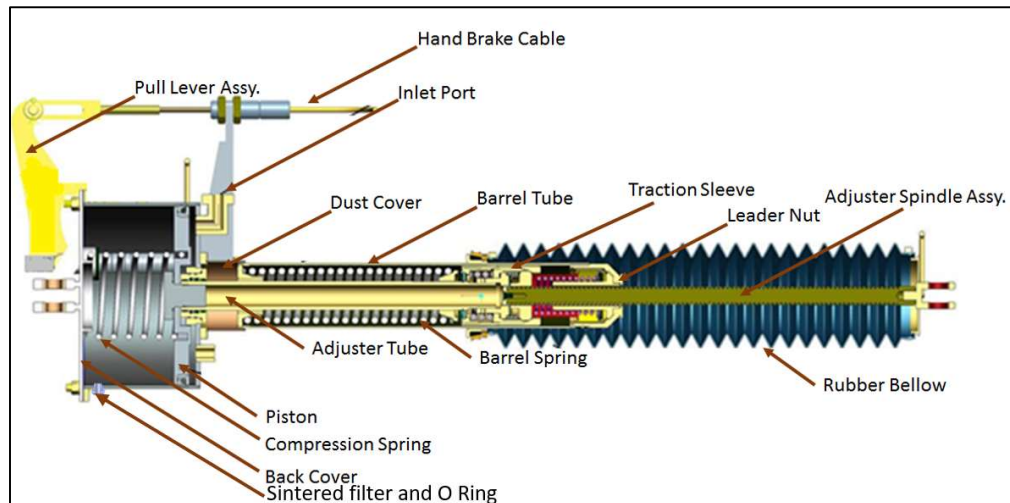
Brake Cylinder – 11 Inch with hand brake arrangement
